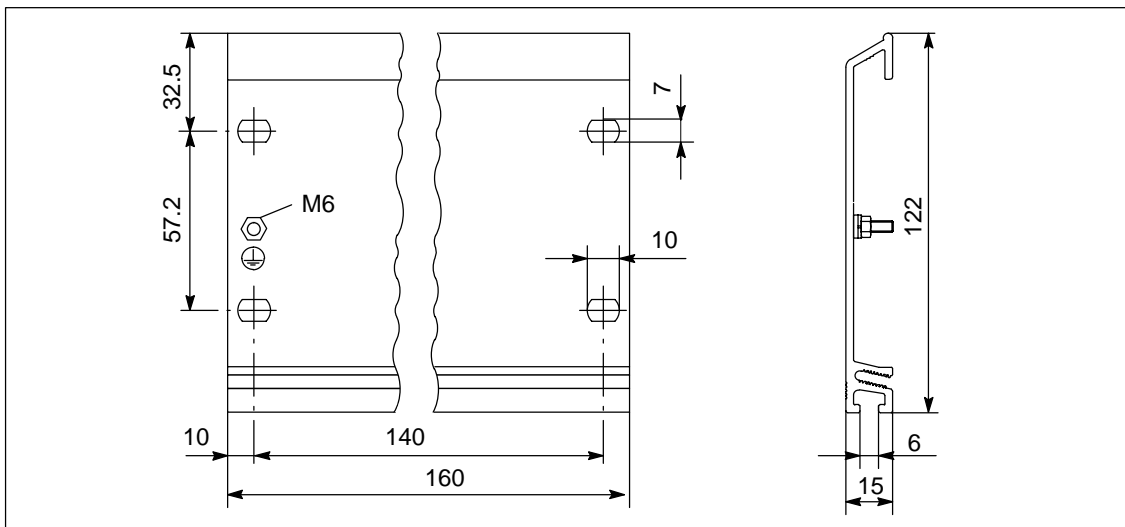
Dimension Drawing of the Rail with 160 mm Standard Width
